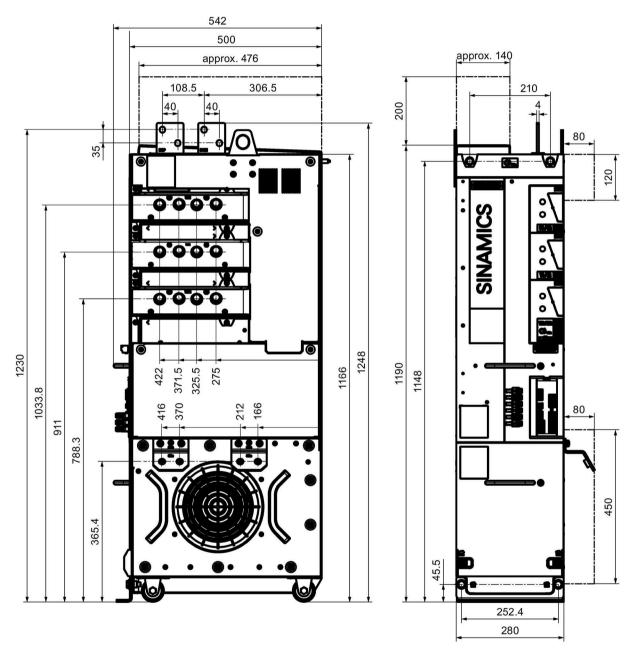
Dimension drawing, Motor Module Chassis-2 format, frame size FS2. Side view, front view
